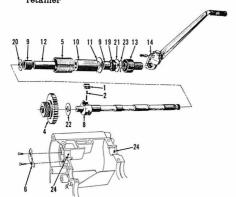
Exploded view of kick starter assembly used on X-6 model.
